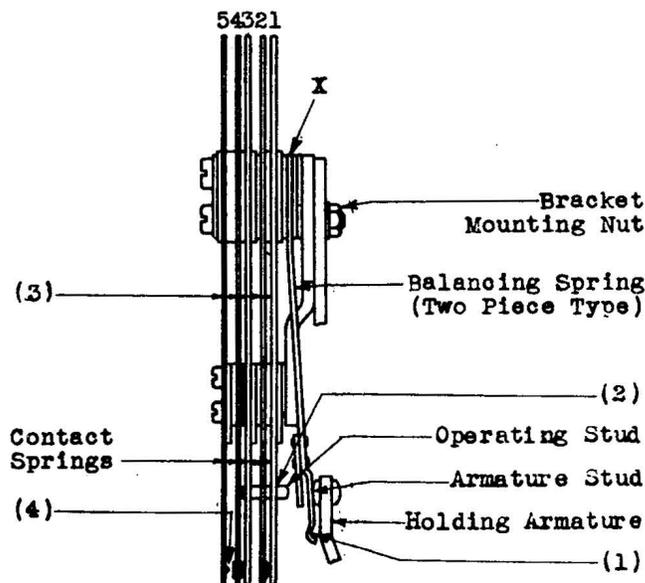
Fig. Q - Bracket Type Holding Off-Normal Spring Assembly
